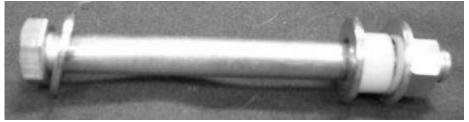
Axle Assembly for Attaching the Wheels.
